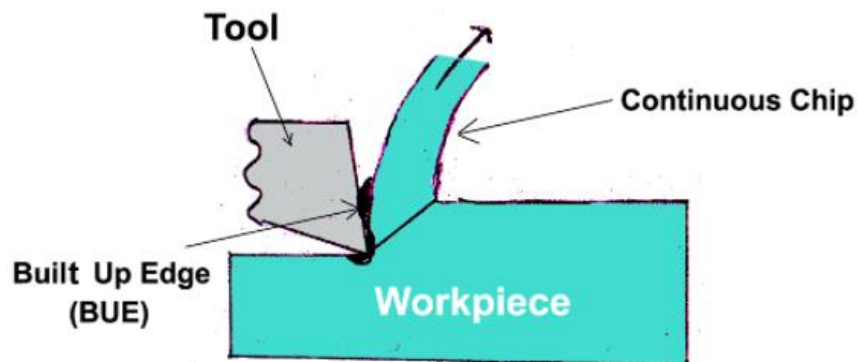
Formation of continuous chips with buildup edge during machining [26]
